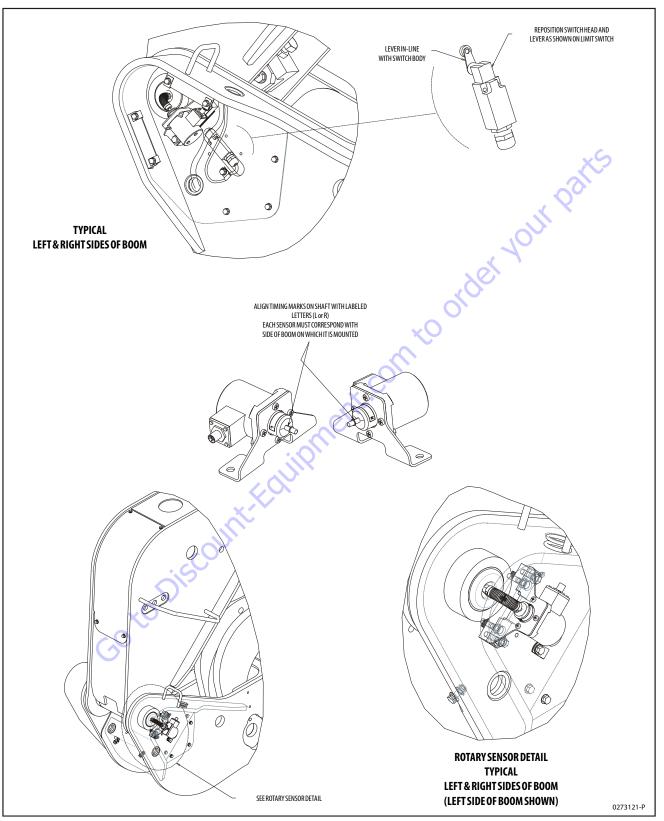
Boom Sensor Locations - Rotary Angle & Proximity Sensor - Sheet 1 of 2
